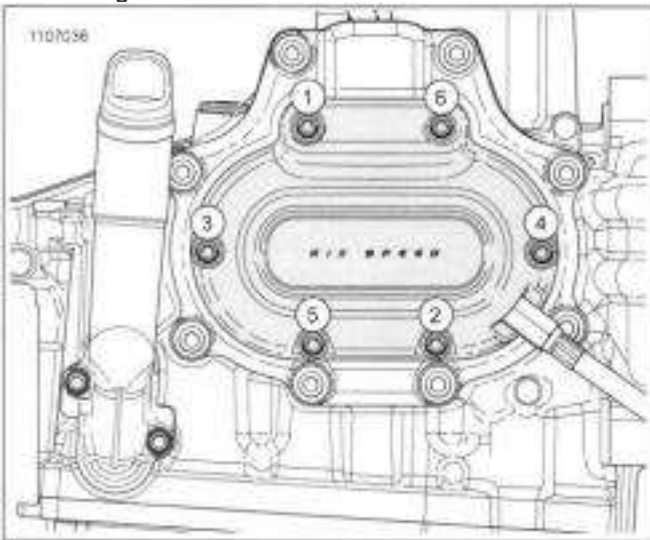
Clutch Release Cover Torque Sequence (Short Screws at Locations 1 and 6)
